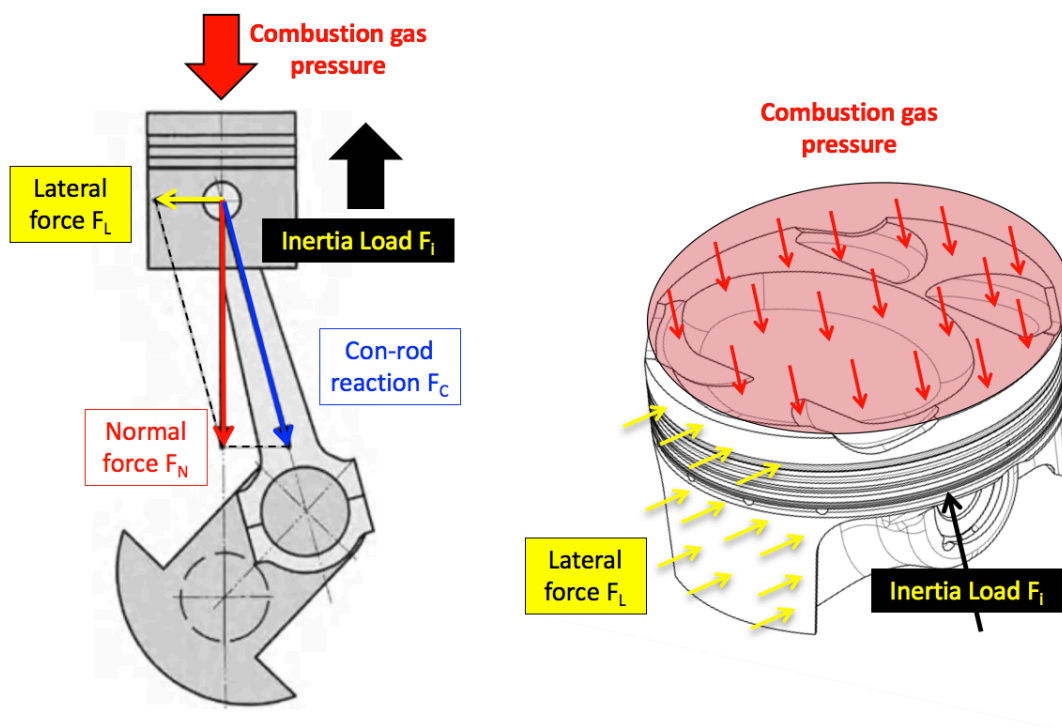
Piston mechanical loads due to combustion gas pressure.
